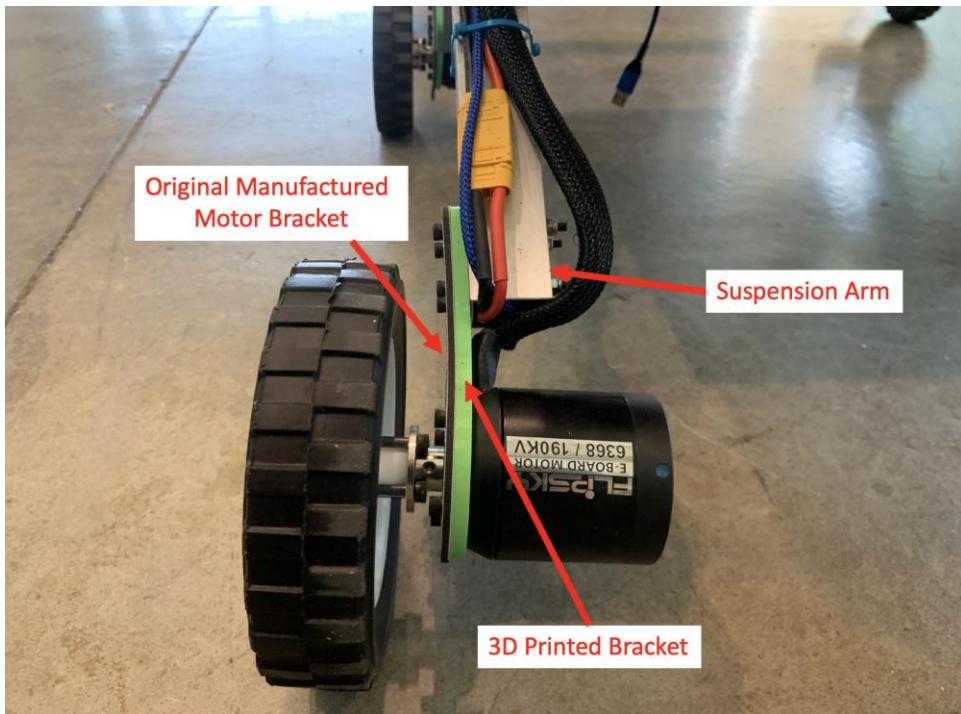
Picture of current motor bracket placement with modified 3D printed bracket.
